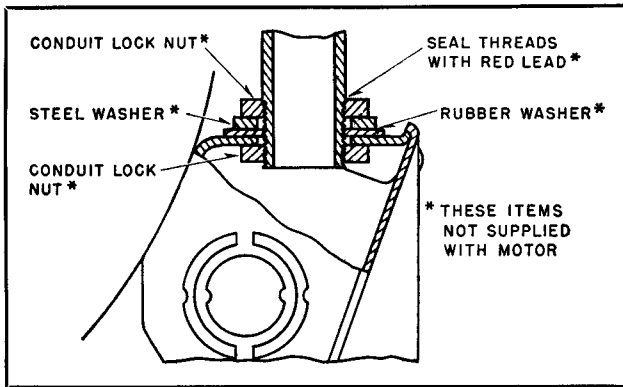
Method of Connecting Conduit to Keep Out Liquids When Leads Enter Top of Conduit Box
